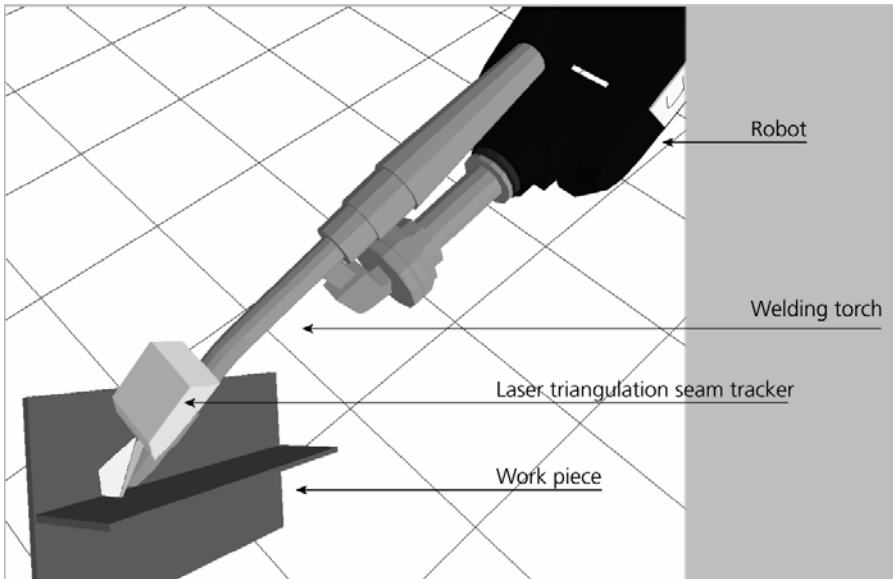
Illustration of a typical laser scanner sensor [3] mounted ahead of the welding torch
